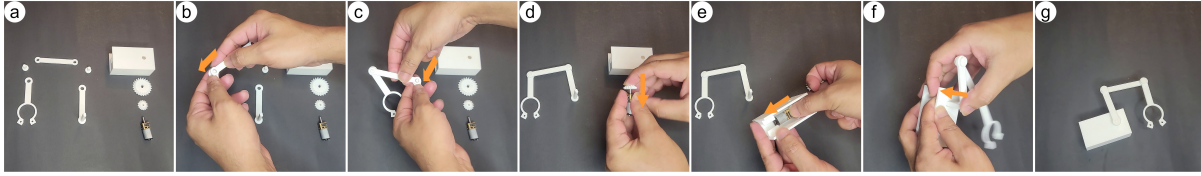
Snap-fit based assembly of the harvester, (a) components of the harvester, (b)-(c) connecting three links with pivots, (d) inserting the driven gear, (e) sliding the generator into the shell, (f) inserting the shaft with driving gear inside, (g) assembled mechanism.
